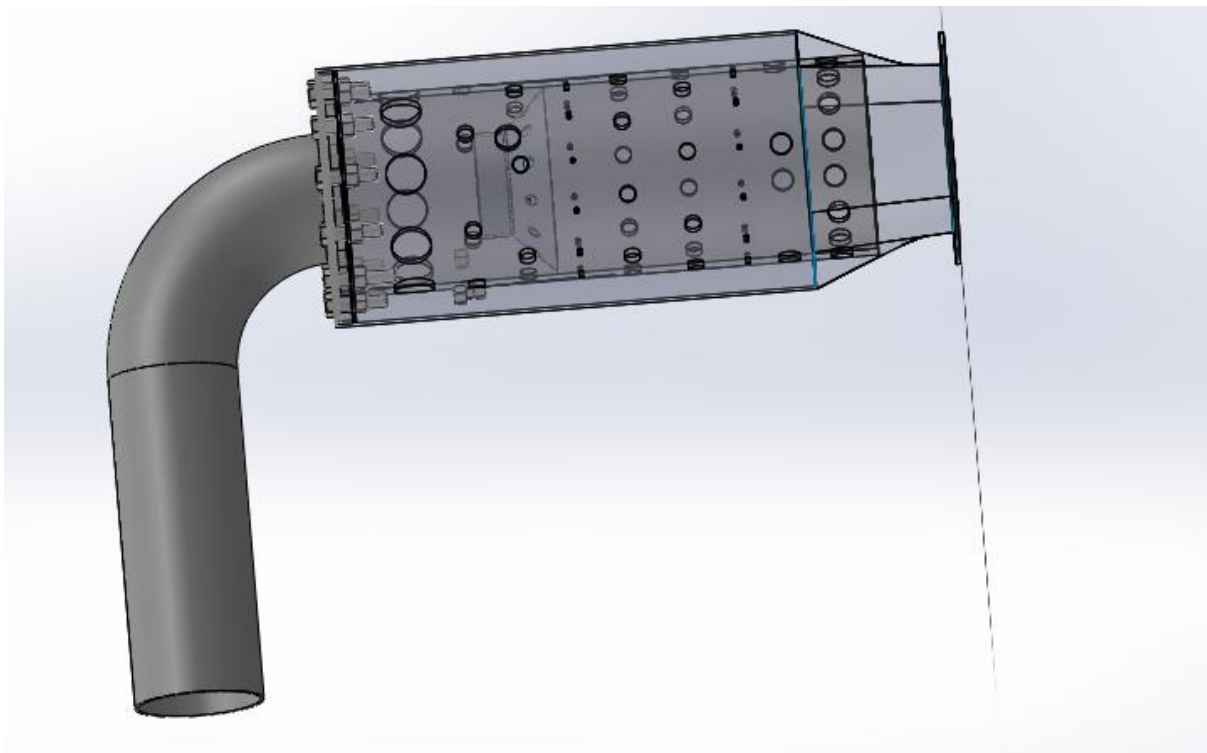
Solidworks Model of Complete Combustion Chamber Assembly
